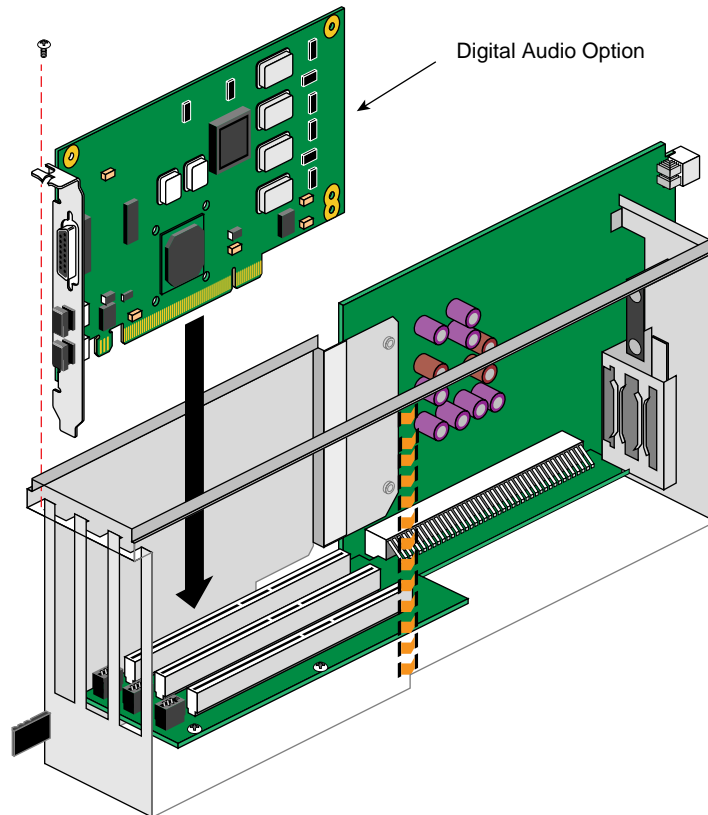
Inserting the Audio Option Board Into the PCI Module
